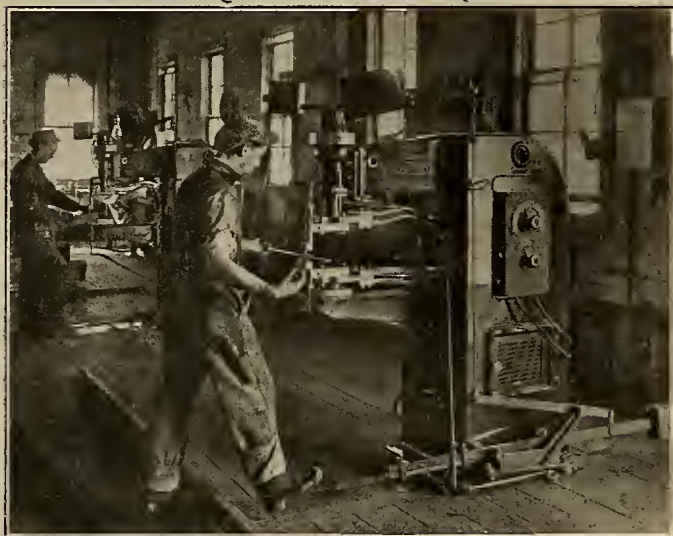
Spot welding outfit in the plant of the Columbia Wire & Iron Works, Portland, Ore.
